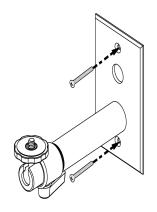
Attach the C11-UM Mount to the Mounting Surface
